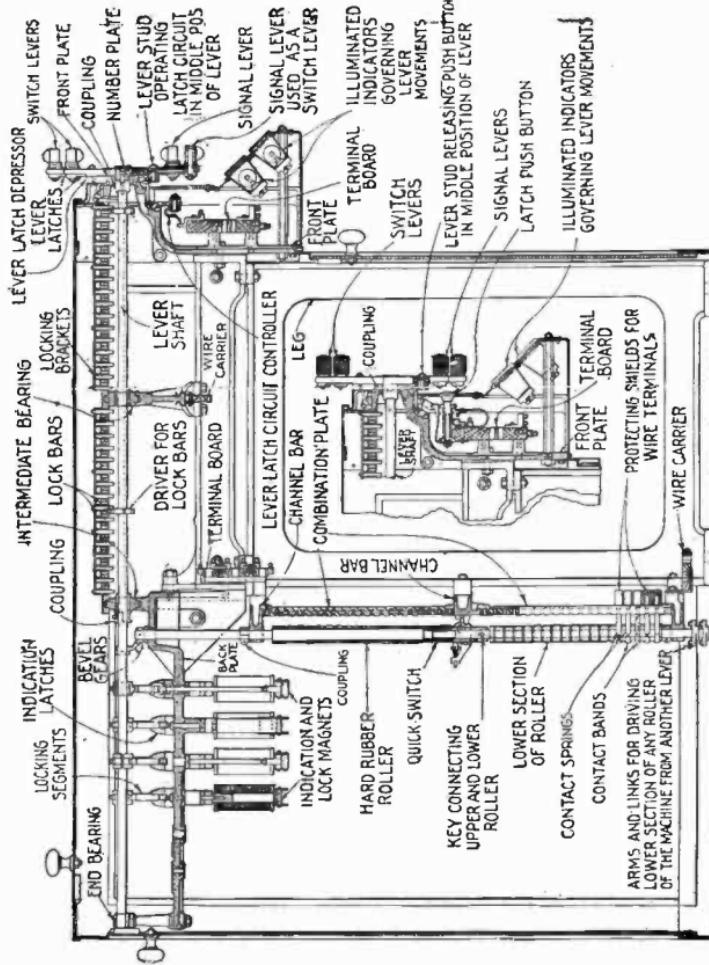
,619.—Union S. and S. Co. power interlocking machine, end view.
